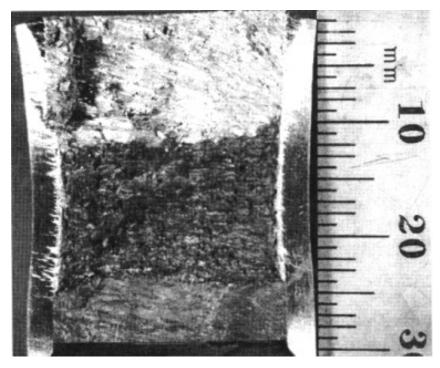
Fracture surface of aged weld metal PWCE tested at 290°C
